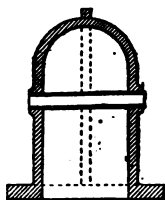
Modified Form of Roots' Improved Ignition Device.
